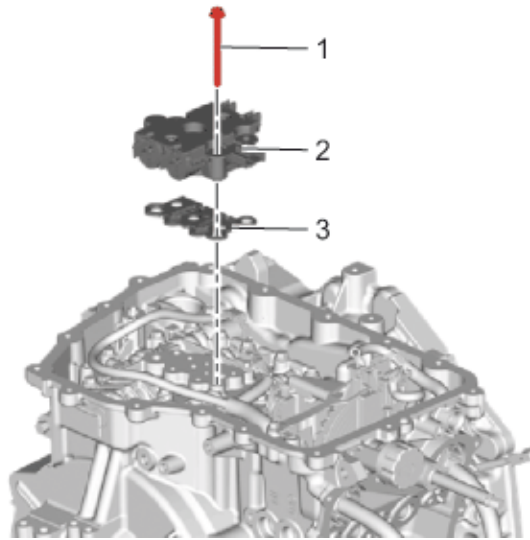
Control Valve Body Bolts, Control Solenoid Valve And Filter Plate
